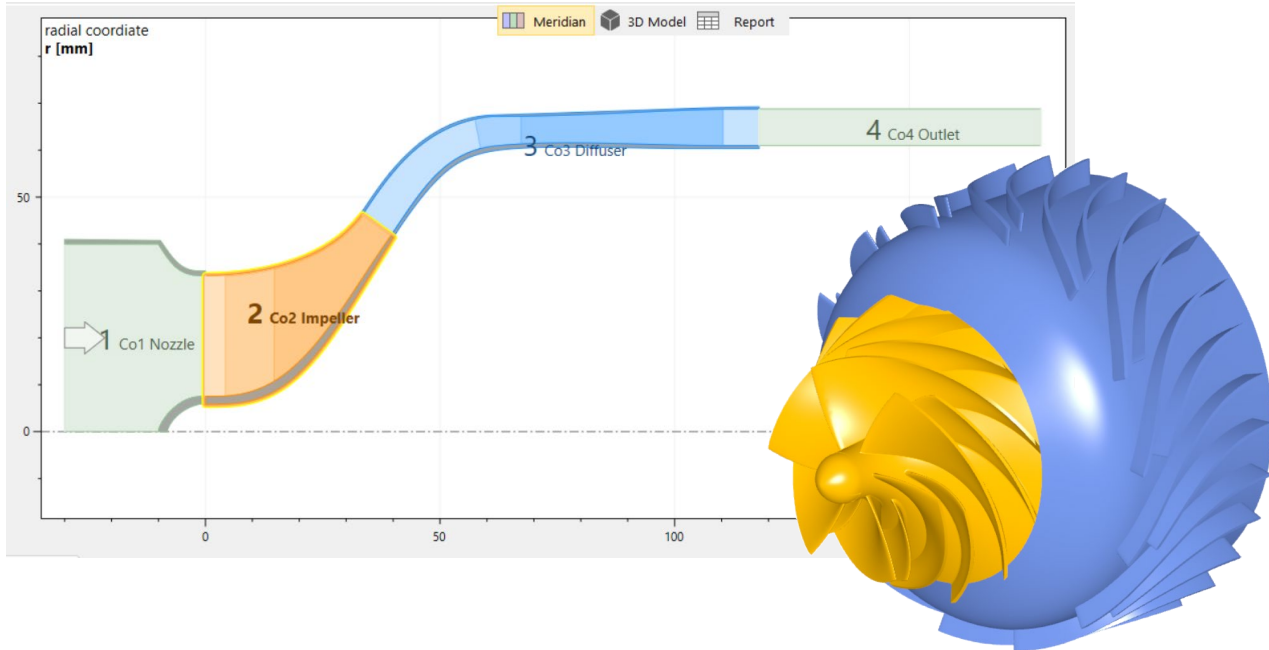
Final design: diagonal impeller and long diffuser blades with splitter blades
